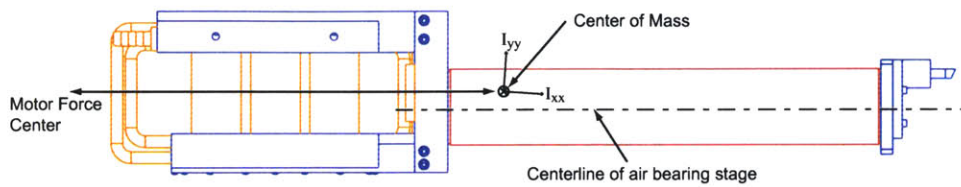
ProE model of machine mounted prototype with the motor force center aligned with the center of mass of the moving FTS components.
